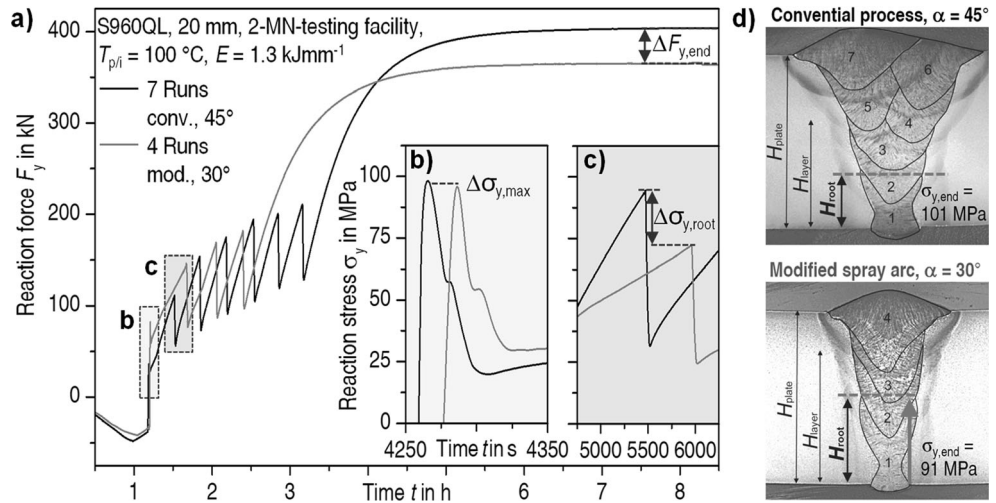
a Reaction force $F_y(t)$ for two weld tests with different seam geometry and welding process, details of reaction stress $\sigma_y(t)$ for welding (b) and cooling (c) of the root, d cross sections of the two different welds [4, 17]
